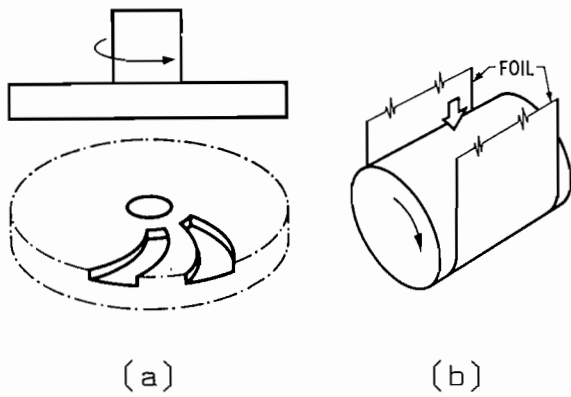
(a) Spiral Grooved Thrust Bearing, (b) Foil Bearing.
